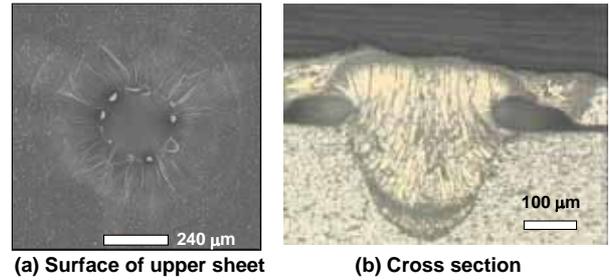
Surface and cross section of laser micro-spot weld produced in A3003 alloy under the adaptive control for the through-hole repair in the upper sheet.
